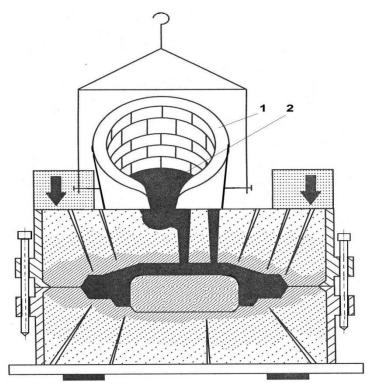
Casting into sand mould 1 – tilting ladle, 2 – melted metal
